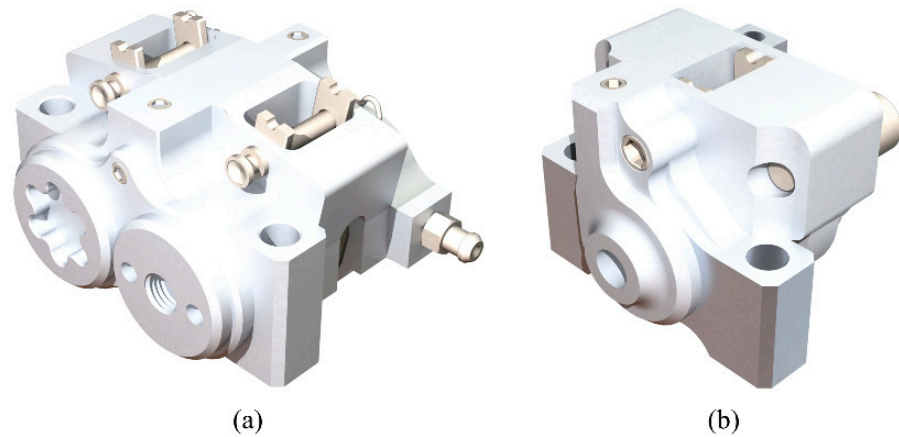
The ISR calipers in SolidWorks: (a) Front caliper and (b) Rear caliper.
